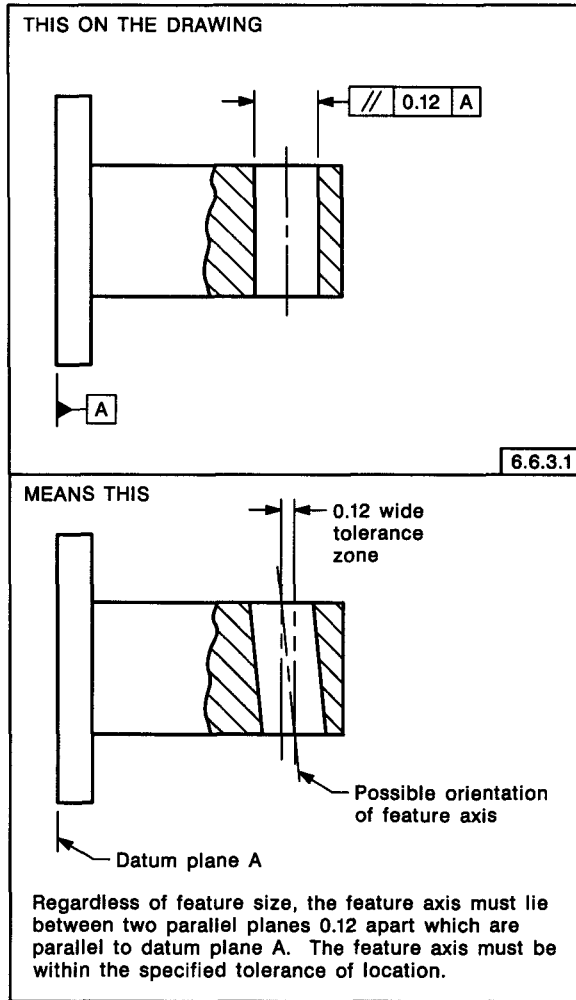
SPECIFYING PARALLELISM FOR AN AXIS (FEATURE RFS)
